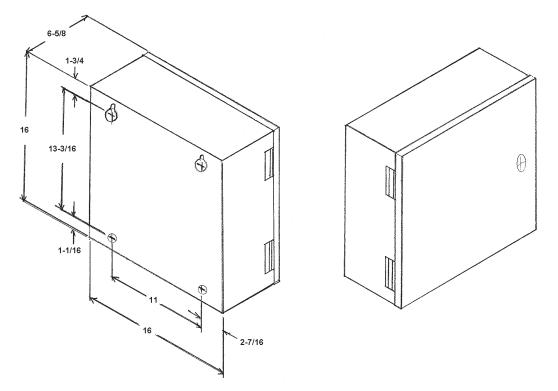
Welder Interlock Cabinet dimensions
